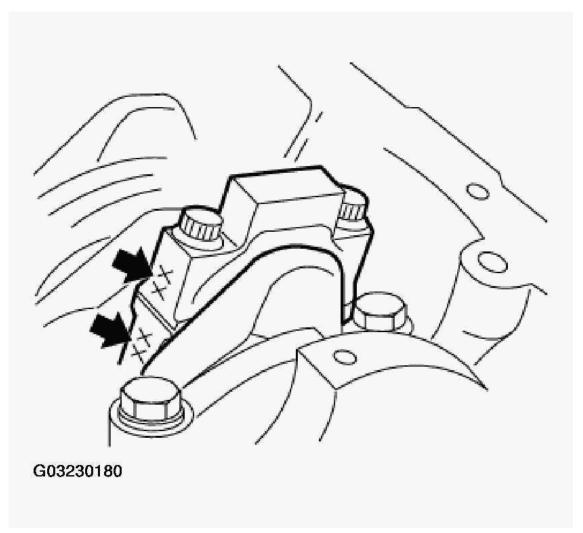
Attaching Crankpin To Connecting Rod Courtesy of BMW OF NORTH AMERICA, INC.
